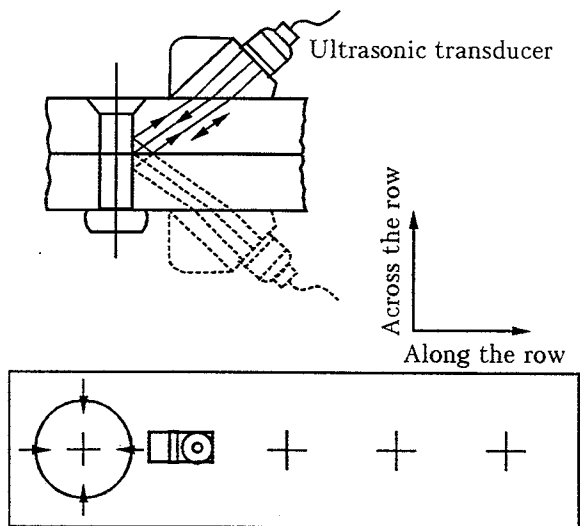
Experiment geometry for ultrasonic measurement of radial clearance in riveted joints
